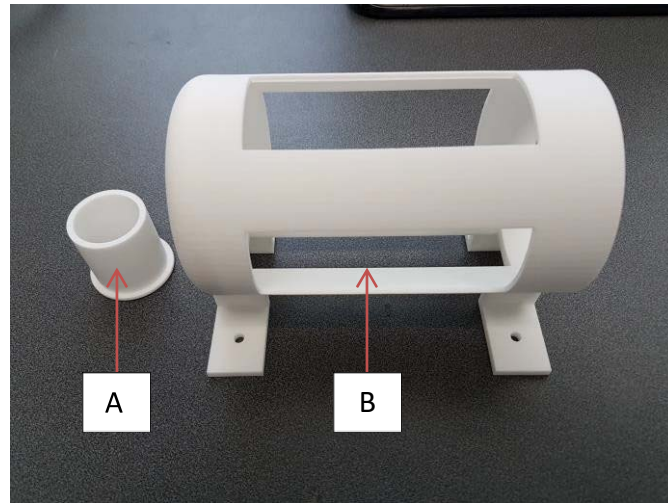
(A): 3D printed bush. (B): 3D printed frame for the piGrip® bellows [56].
